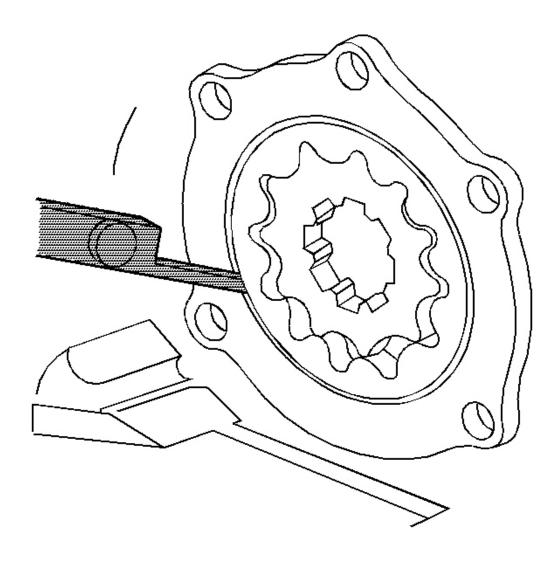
Measuring Outer Oil Pump Gear Diameter Clearance Courtesy of GENERAL MOTORS CORP.
